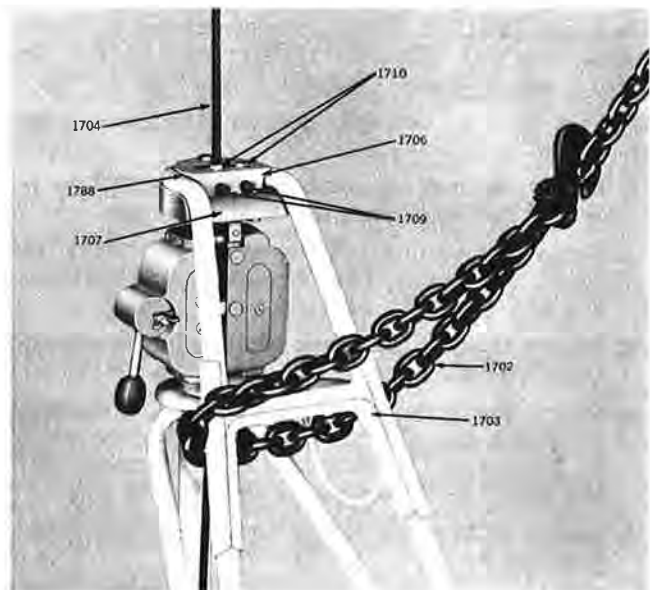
Tripod, Wire Rope Guide and Transfer Chain
